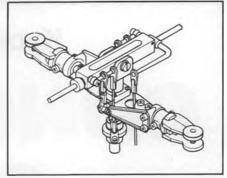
The hingeless main rotor on Kalt's Baron 28 replaces the mechanical flap hinge with a flexible steel plate.
